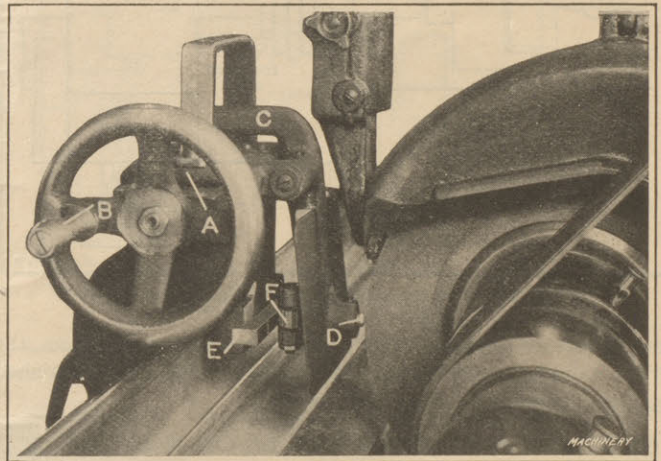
Norton Special Form Wheel Truing Device for truing Wheel for grinding Shrapnel Shell Body
